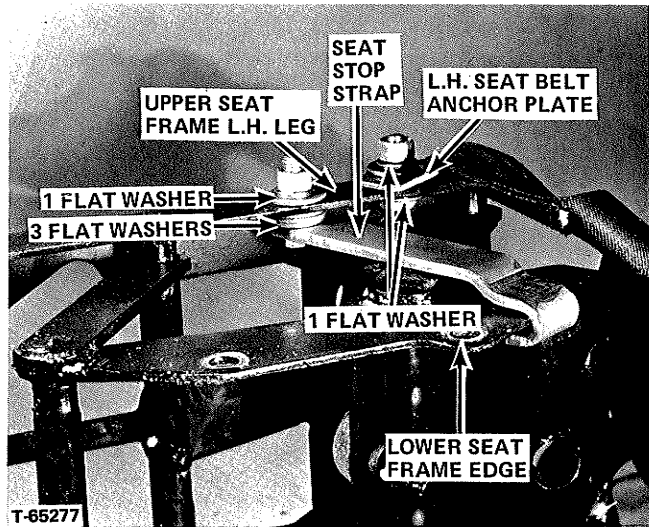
Seat Frame Viewed from Beneath Lower L.H. Side.
